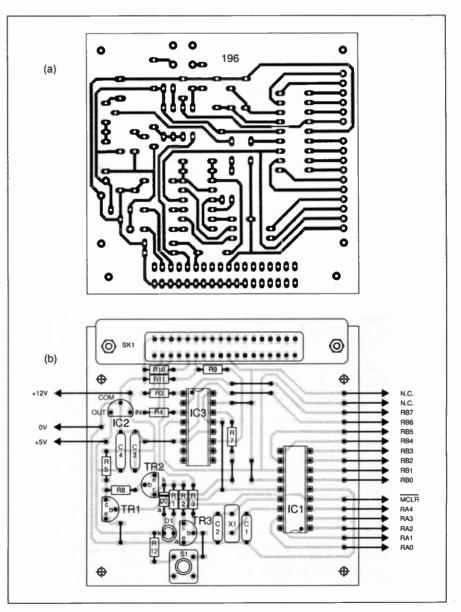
(a) Full size copper foil track master. (b) Complete component layout and termination points when using the Toolkit as an independent unit.
